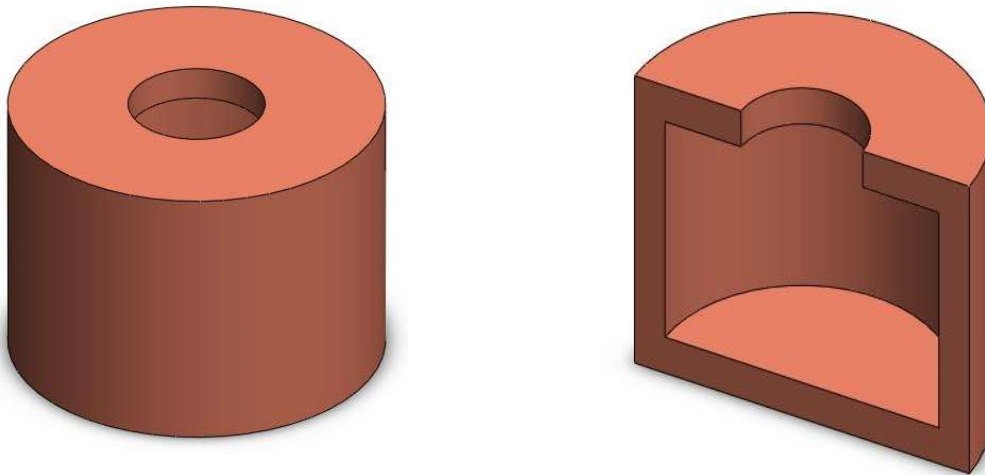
Recessed hole (a) Isometric View (b) Section or, Cutaway view of the hole
